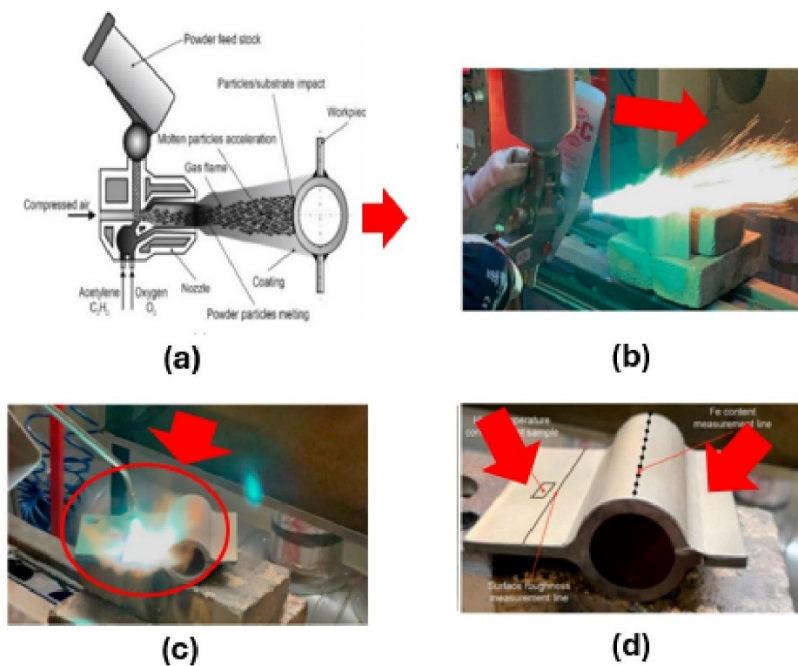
The steps involved in flame powder spraying: (a) a manual flame powder spray burner diagram; (b) a view of a flame powder spray test using a CastoDyn DS 8000 burner for a remelttable Ni-Cr-B-Si alloy coating; (c) a view of the remelting test of the coating sprayed with a self-fluxing powder made of the remelttable Ni-Cr-B-Si alloy; and (d) a view of the sample covered by the coating that prevents corrosion at high temperatures [151].
